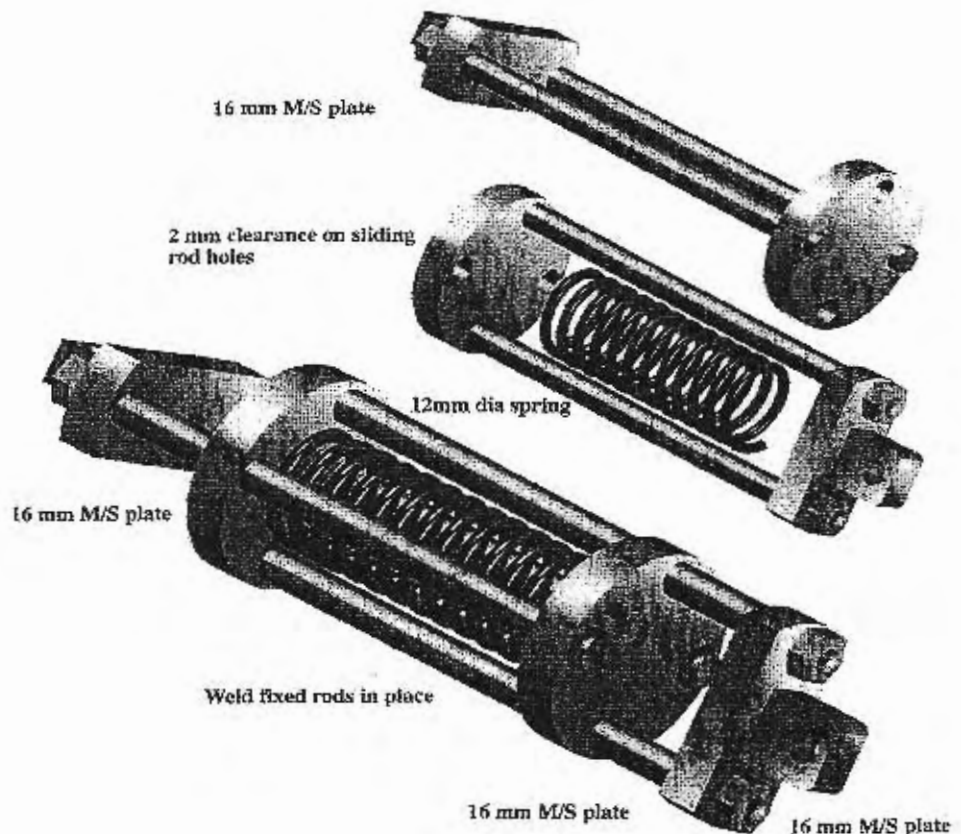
IMPROVED SHOCK ABSORBER USING A STEEL SPRING.
